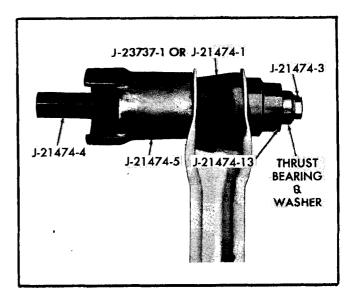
Installing Upper or Lower Control Arm Bushing (Coil Spring Suspension)
